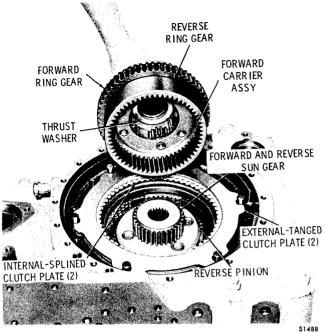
Installing forward planetary carrier assembly and attached parts (-3 overdrive model)
